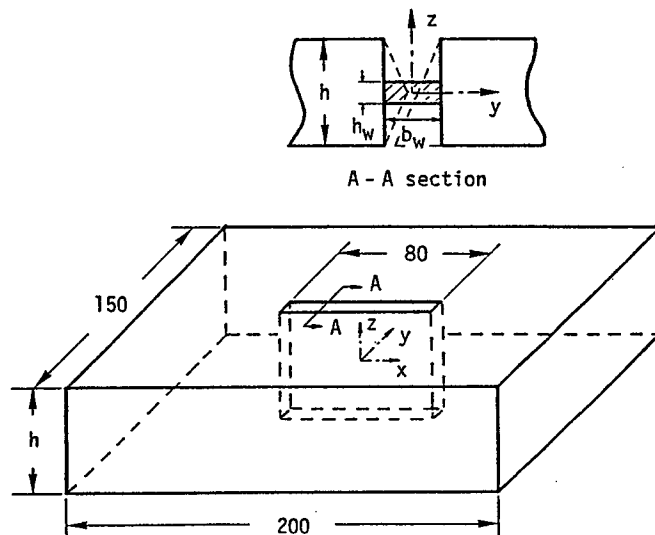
Oblique Y-groove weld cracking test specimen
